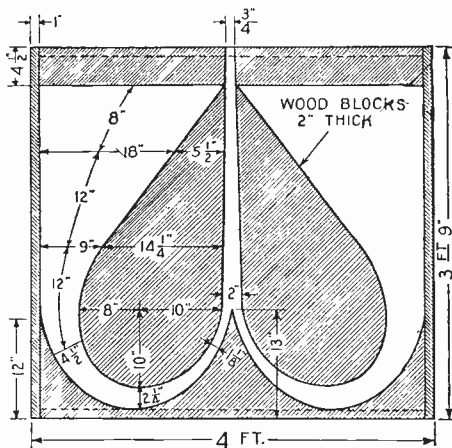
The plans for the exponential horn showing the layout of the baseboard and central portion.
